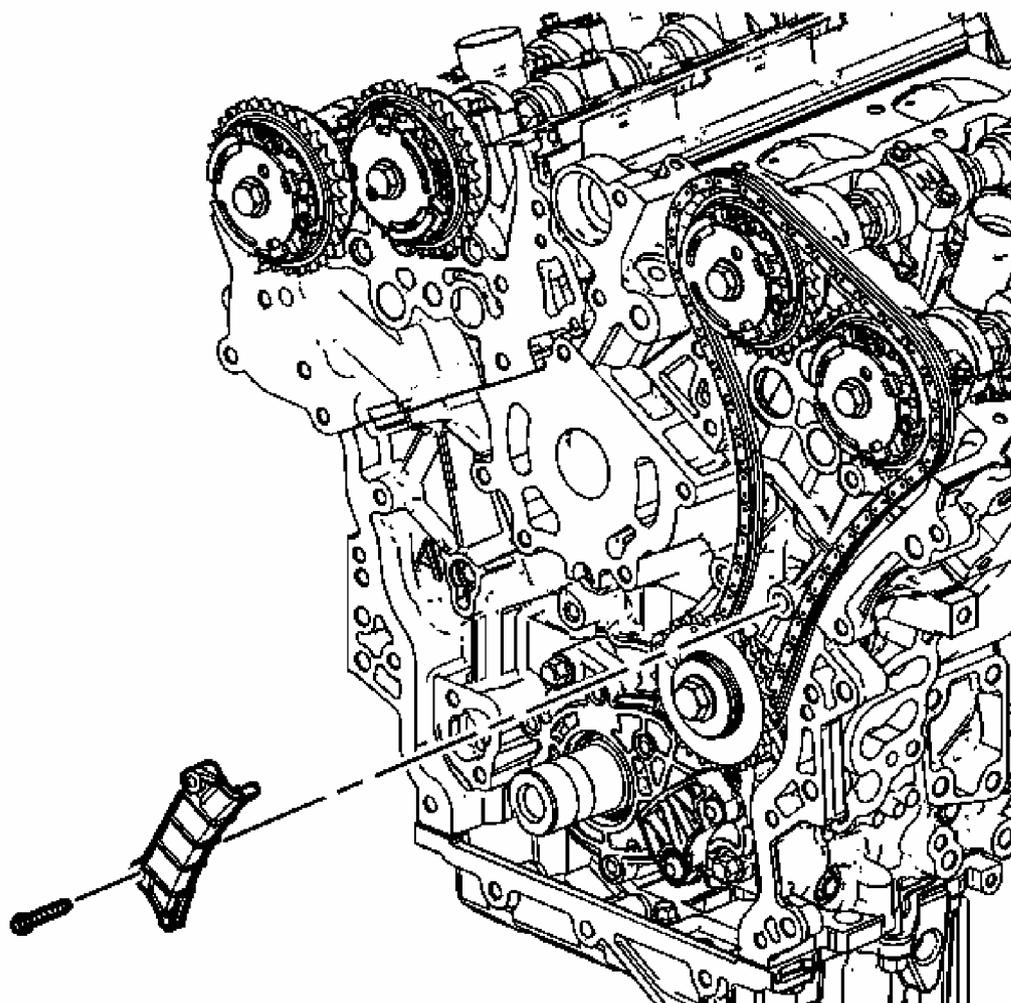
View Of Left Bank Secondary Camshaft Drive Chain Guide
